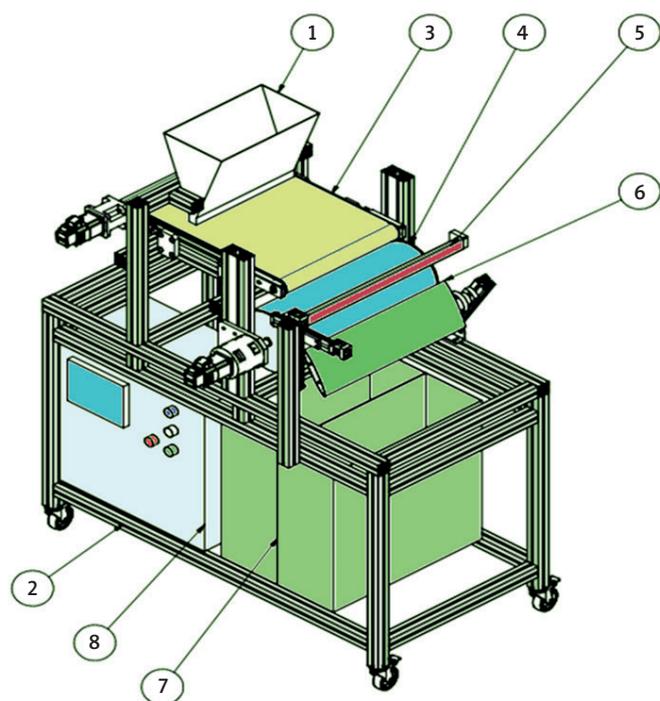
Isometric view of the designed ES system: 1 – material feeder, 2 – aluminum frame, 3 – belt transporter, 4 – rotating drum, 5 – corona electrode, 6 – deflection electrode, 7 – material collectors, 8 – electrical cabinet
